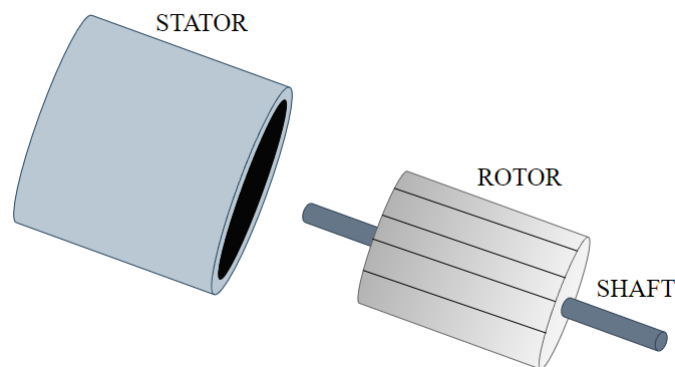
Schematic image of stator, rotor and shaft. The rotor is made up of thin laminates.
